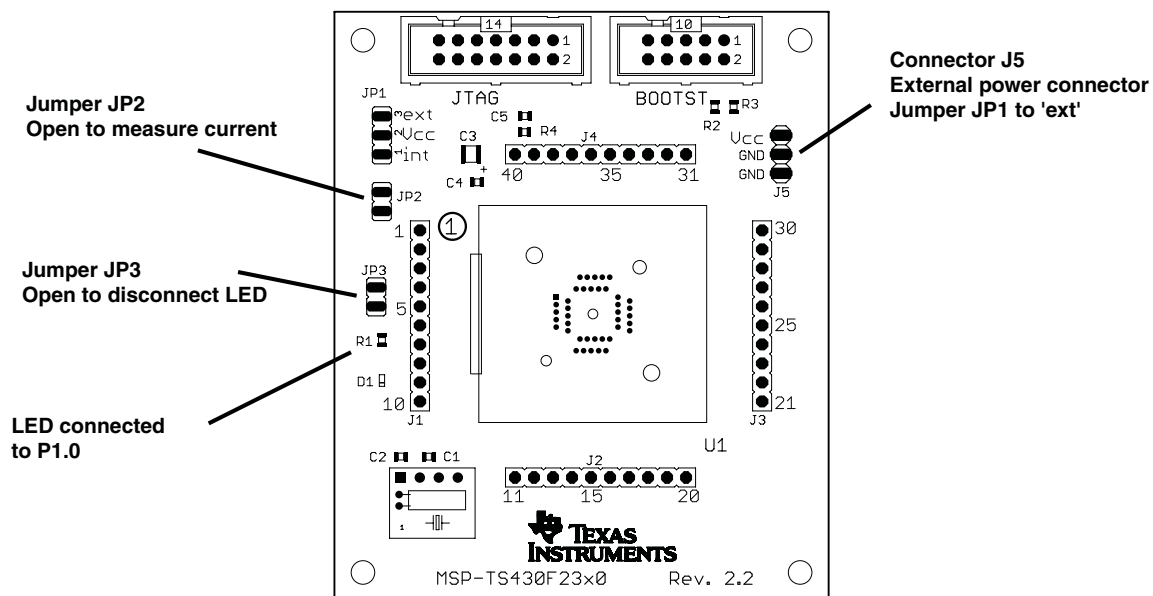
MSP-TS430QFN23x0 Target Socket Module, PCB
